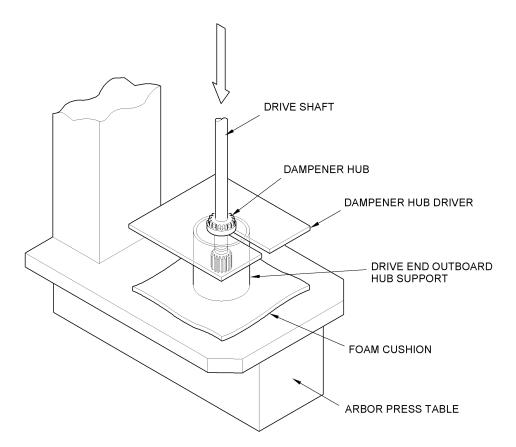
Remove the Dampener Hub from the Drive Shaft
